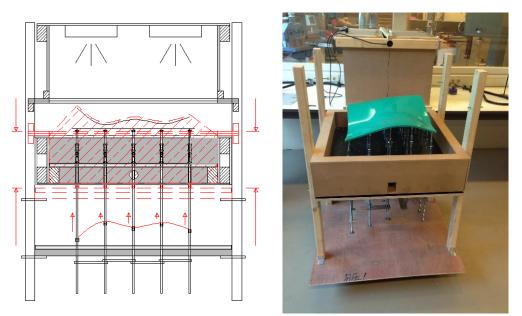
Section of vacuum mould & Figure 4b: The final vacuum mould
